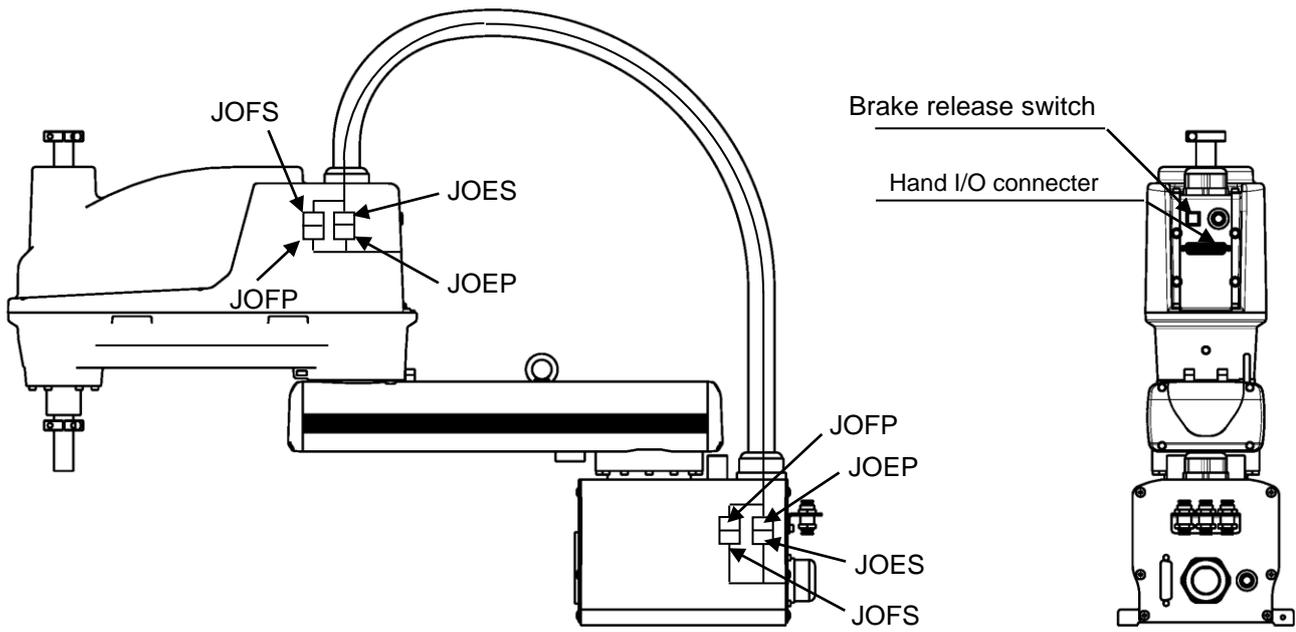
Tool wiring (KHL-500, KHL-600 and KHL-700)
